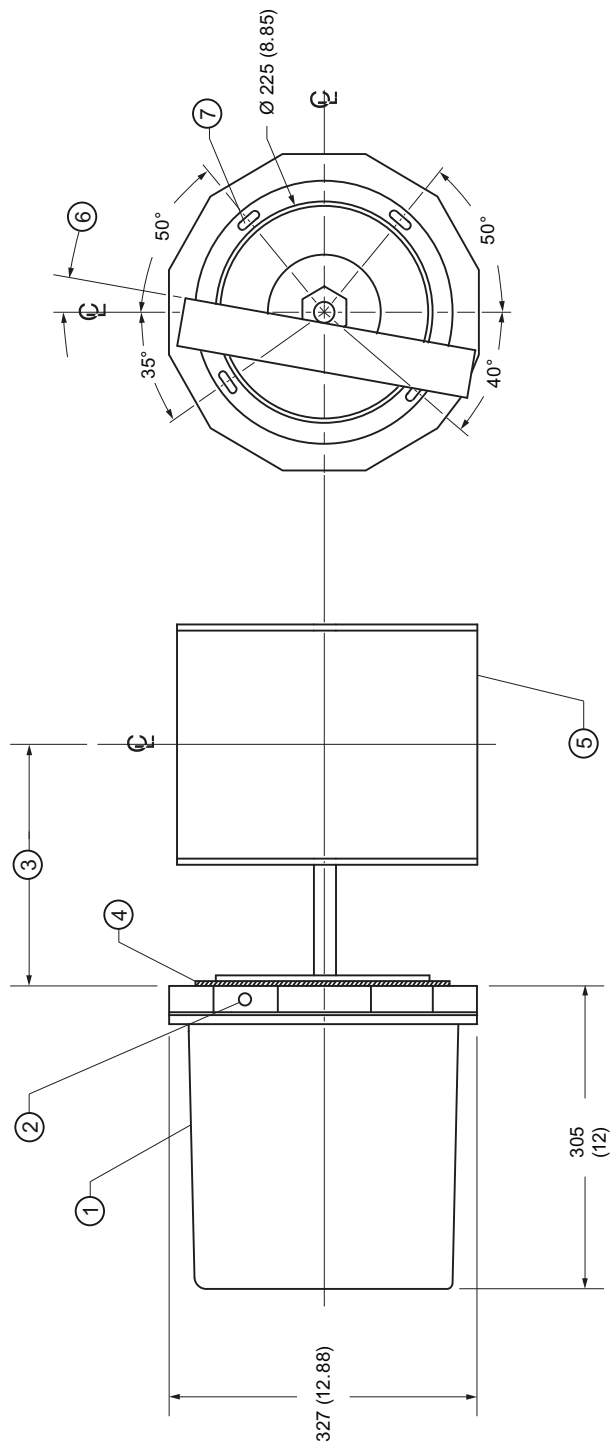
WFS300 side mount, dimensions in mm (in)
